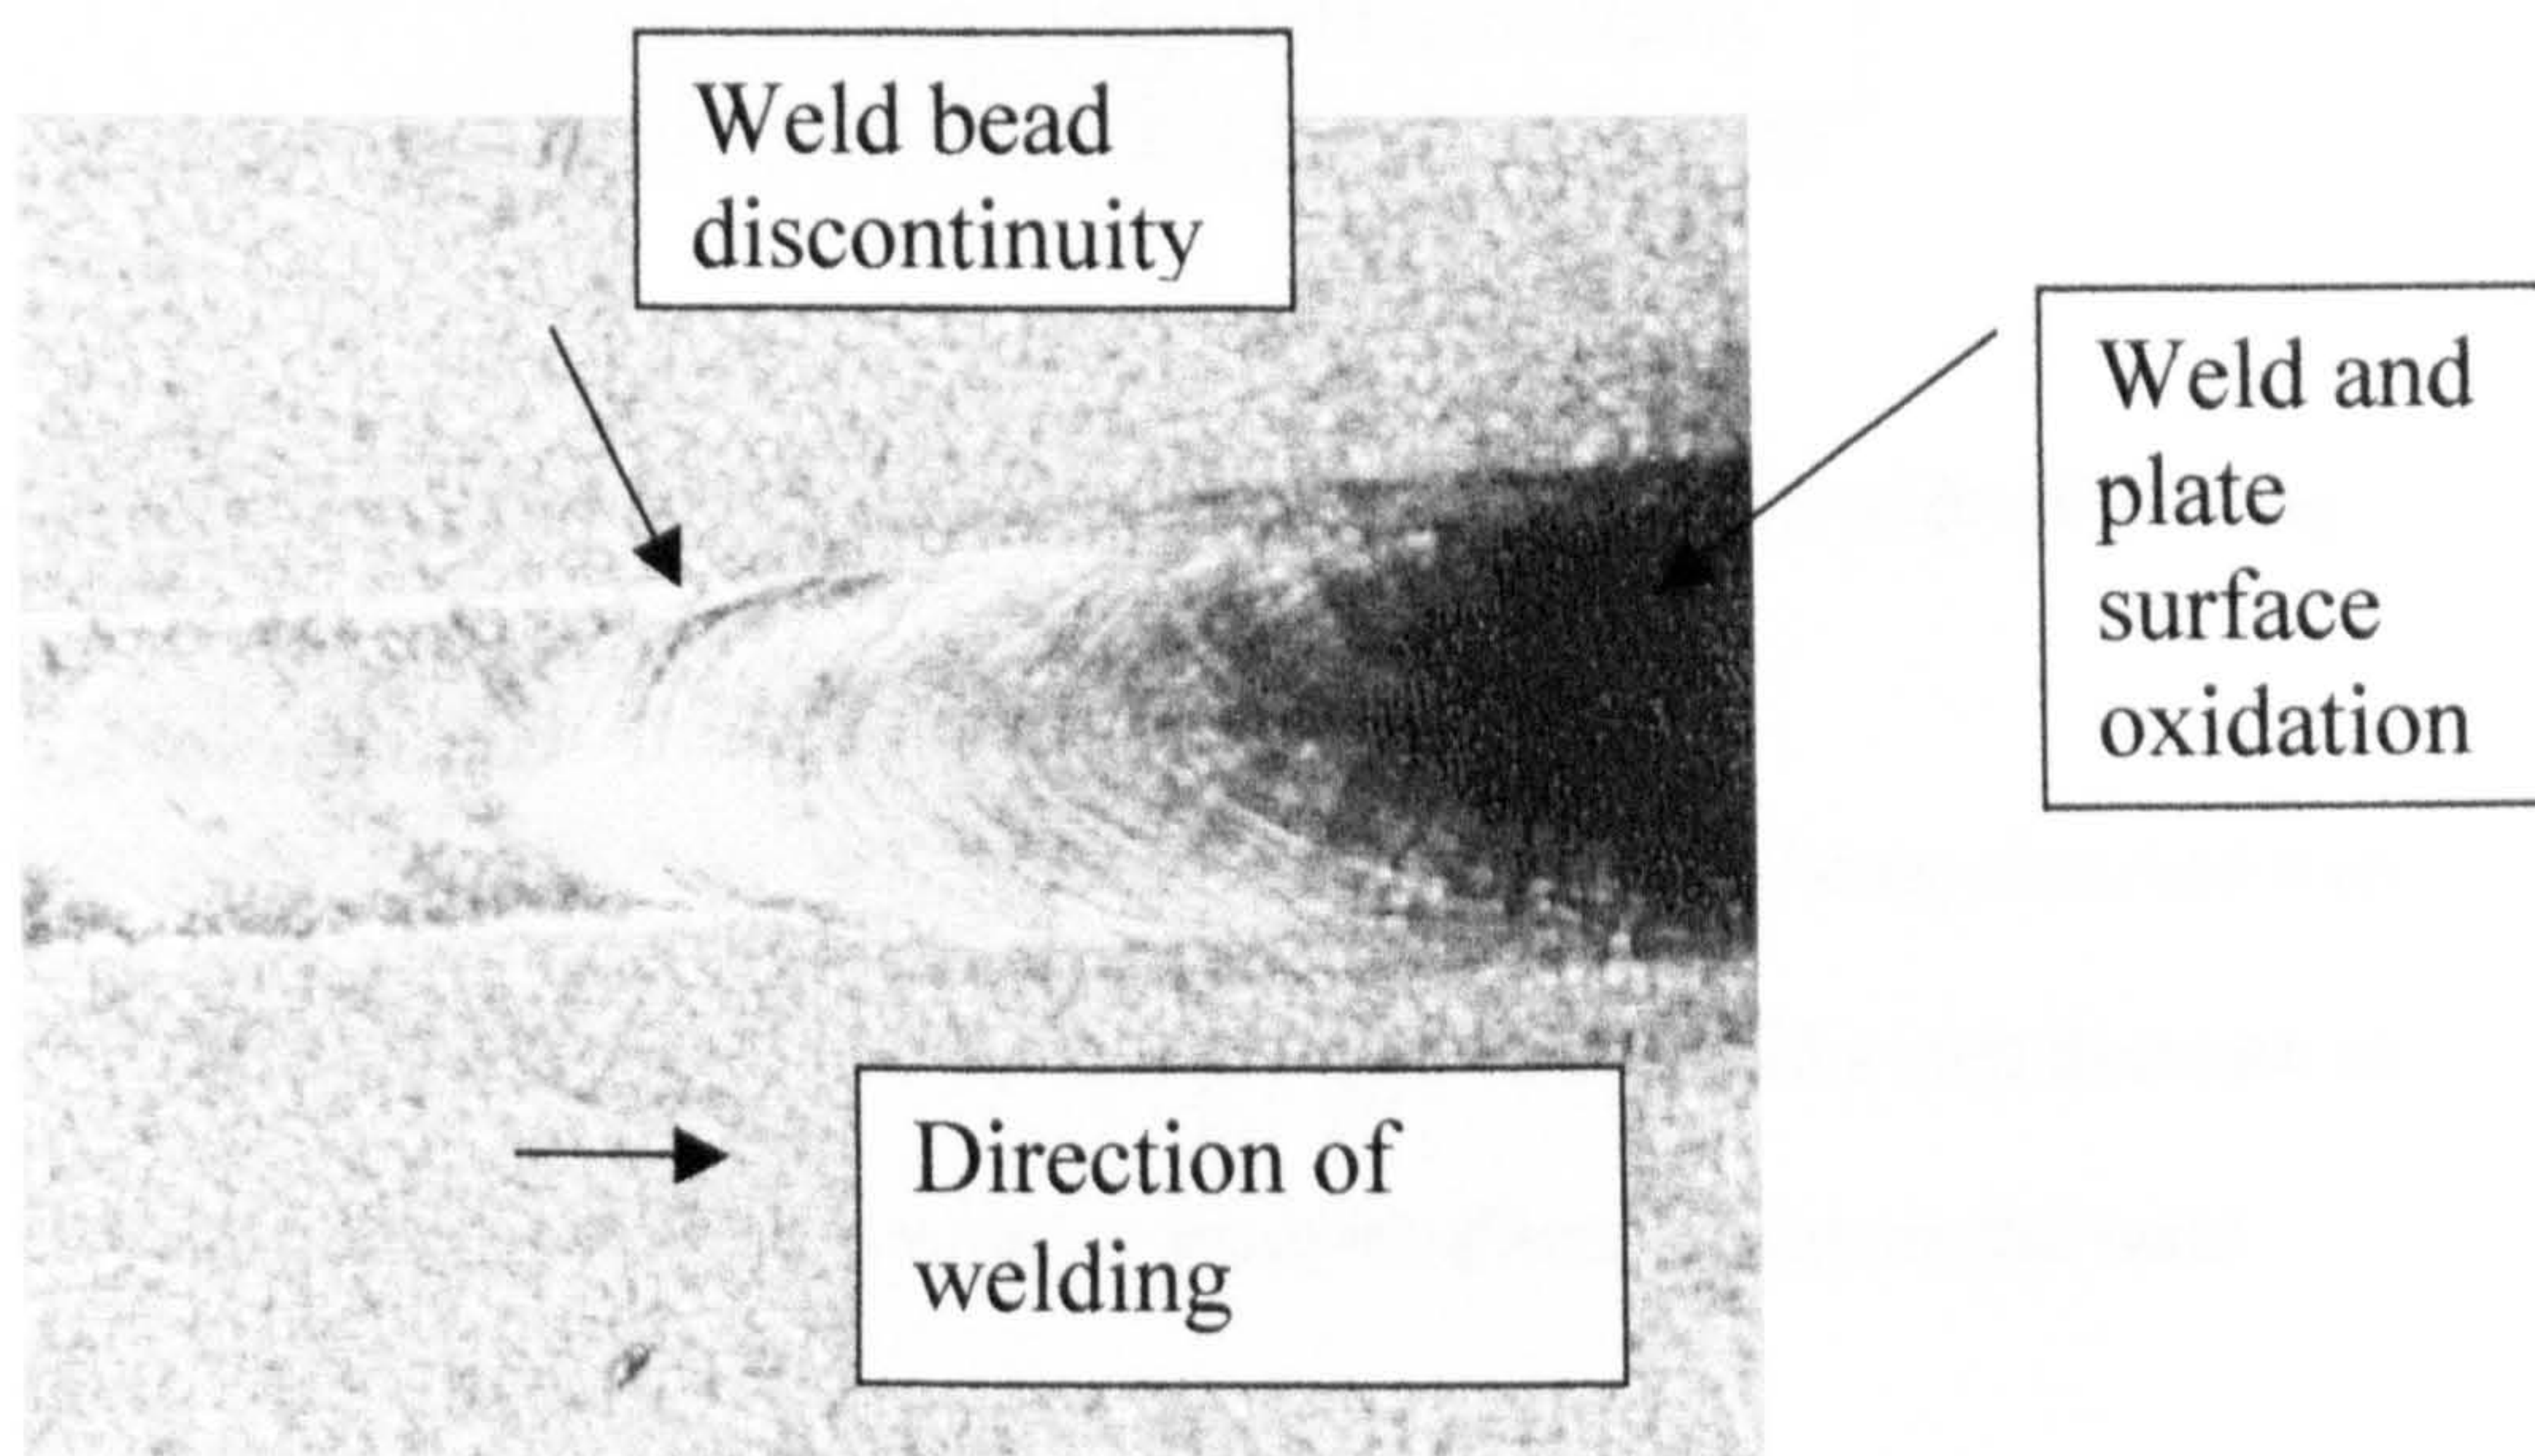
Transition point on bead on plate weld made on an include 1.0mm mild steel sheet.
